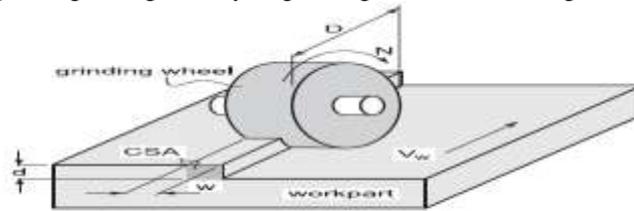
The Geometry Of Surface Grinding Showing The Cutting Conditions
